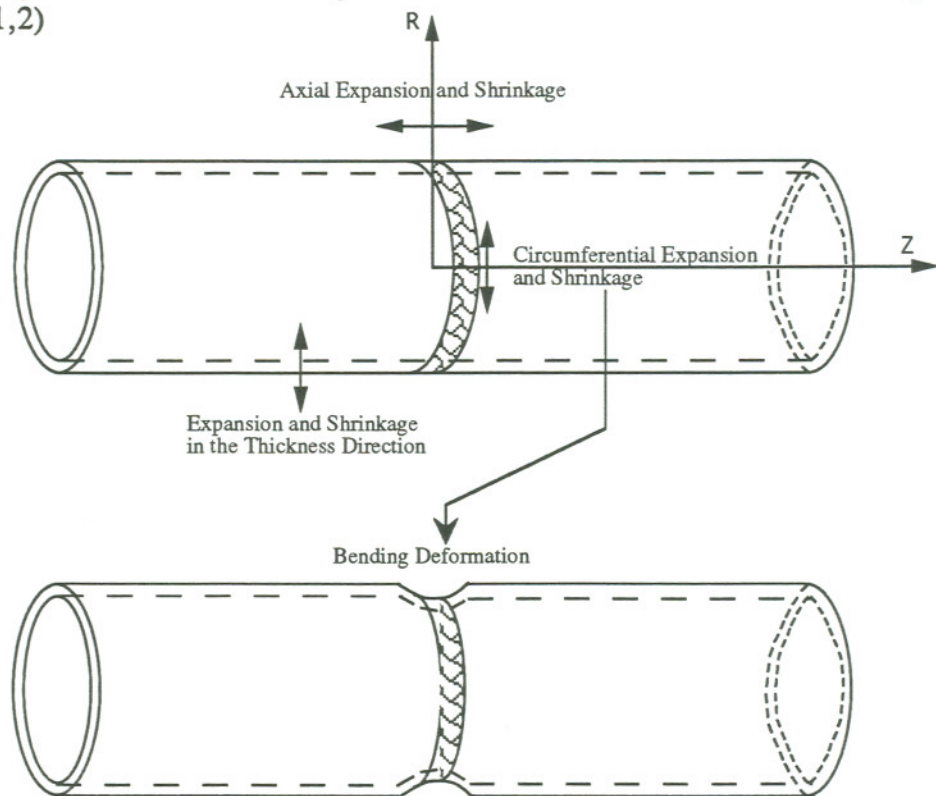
Expansion and Shrinkage at the Joint of a Pipe Circumferential Butt Welding (14)
